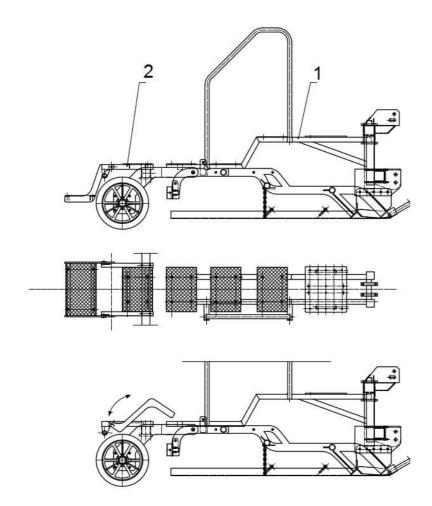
Supporting structure of the HYBRO weeder: 1 - horizontal section of the supporting structure, 2 - rotating section of the supporting structure
